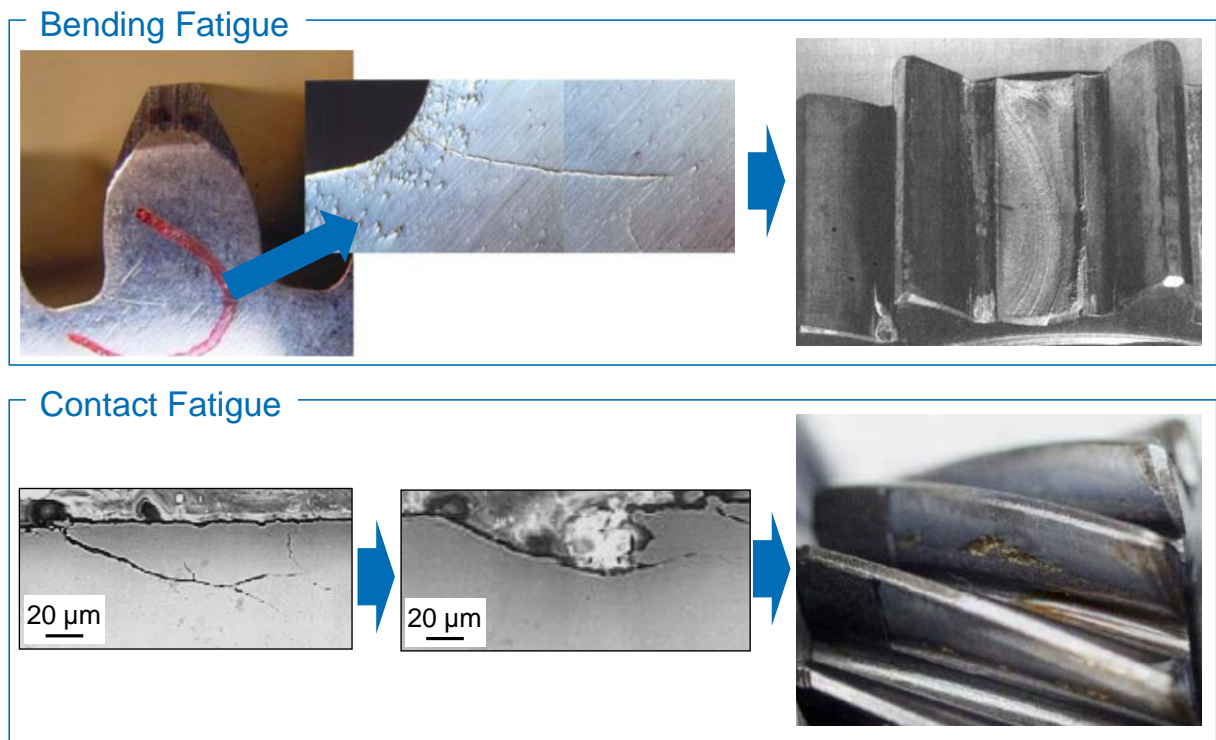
Gear fatigue failure modes: bending and contact stresses (LECHNER; NAUNHEIMER, 1999; DING; RIEGER, 2003; BELSAK; FLASKER, 2006).
